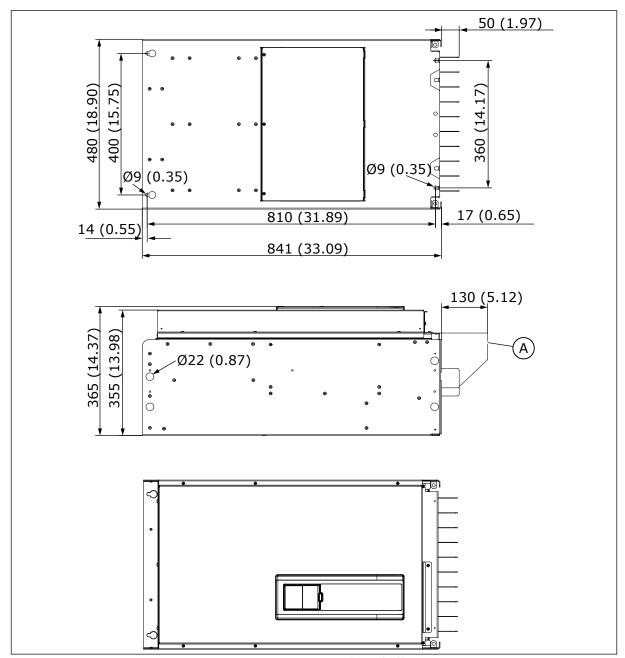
The dimensions of the AC drive, MR9 and MR11 [mm (in)]
